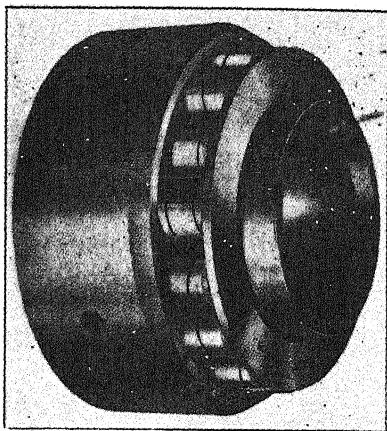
Straight roller bearing, showing inner and outer races and roller assembly.
